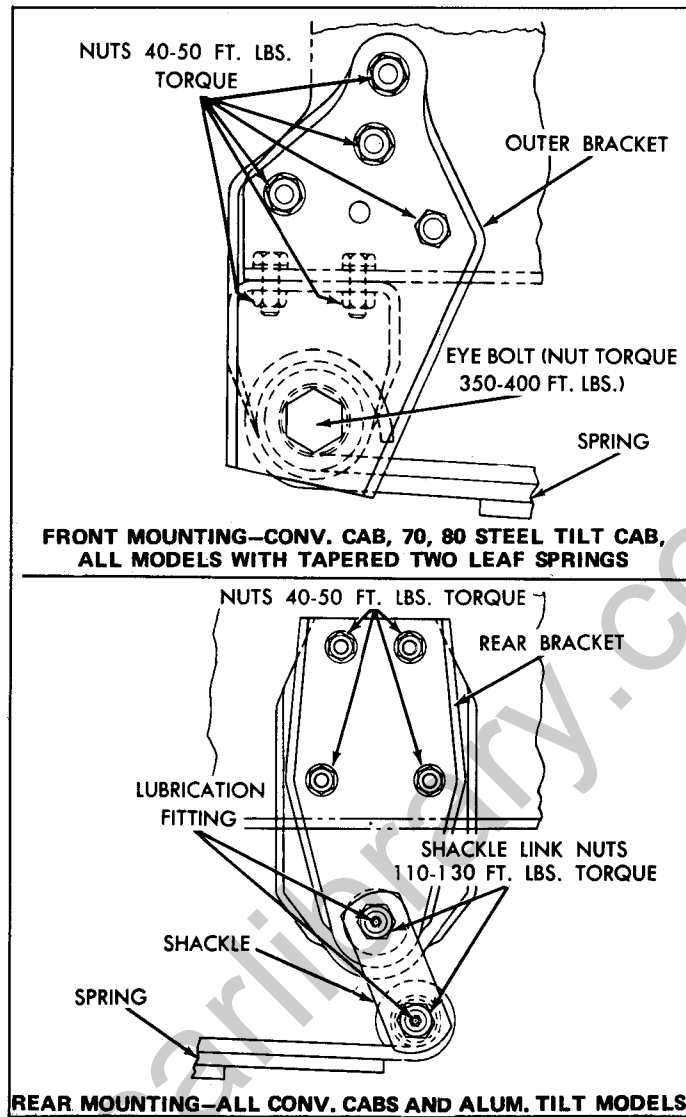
Front and Rear Mountings (Front Spring) (Typical)
